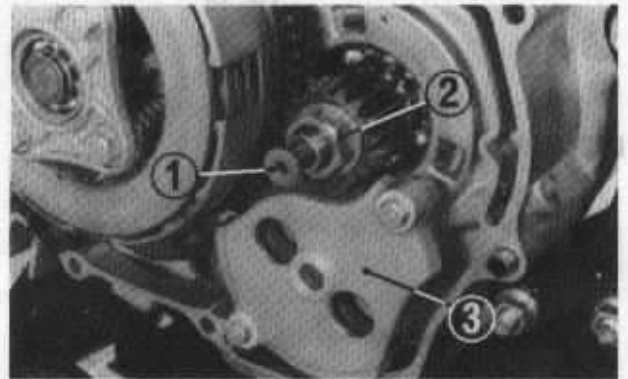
(1) Oil through pipe (2) 14 mm lock nut (3) Oil pump
